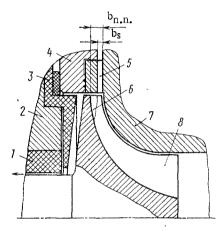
Fragment of the longitudinal section of the M28 turbine expansion engine: 1) labyrinth seal; 2) housing of the bearing; 3) heat insulating vessel; 4) housing of the starter; 6) dead zone; 7) the stationary cover jaw; 8) rotor.
